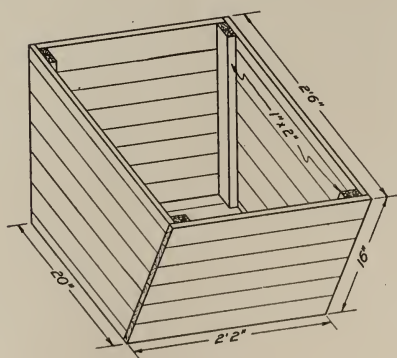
The manure box shown may be made of wood or light galvanized iron, with light band iron reinforcing the corners. Two boxes fit conveniently on the carrier platform.
